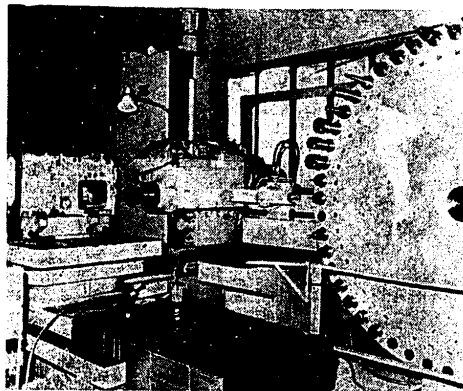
The CU-9 numerically controlled machining center machining the Z 16045 tractor transmission's housing.
